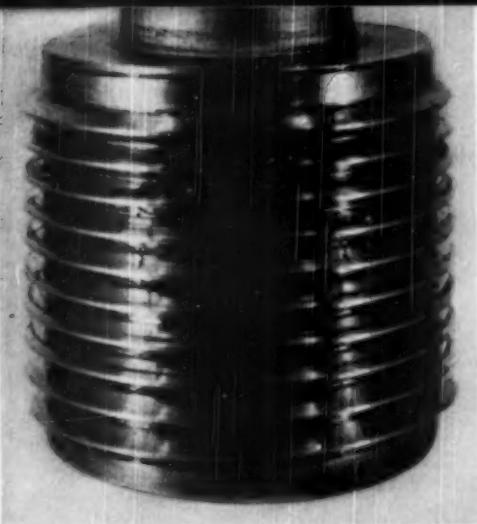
Plug Gage, $1\frac{1}{8}$ In. Diameter x $2\frac{1}{4}$ In., of Manganese Oil Hardening Steel. Grinding cracks developed because of failure to temper after quenching
